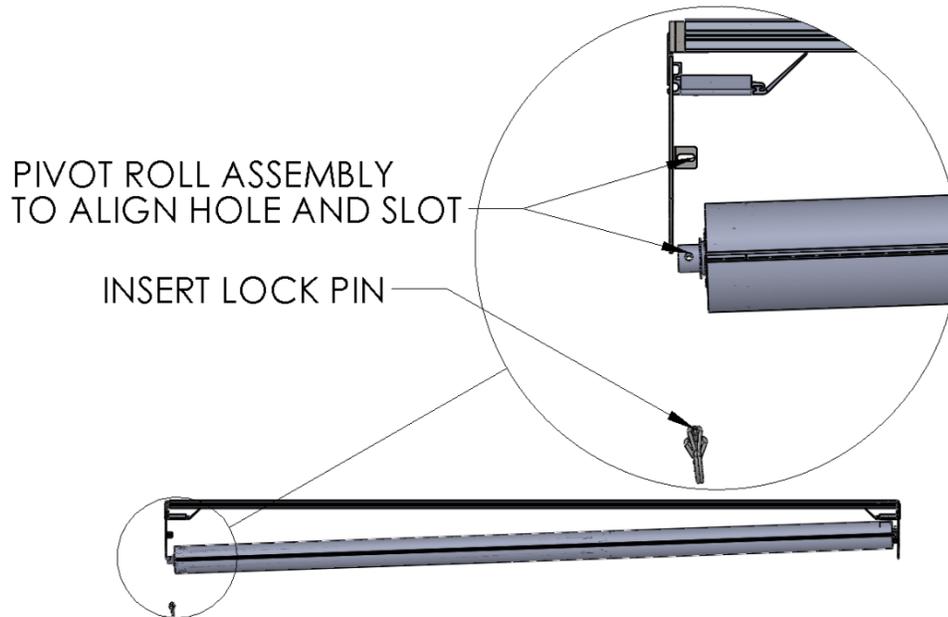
INSTALL IDLER SIDE OF ROLL ASSEMBLY
